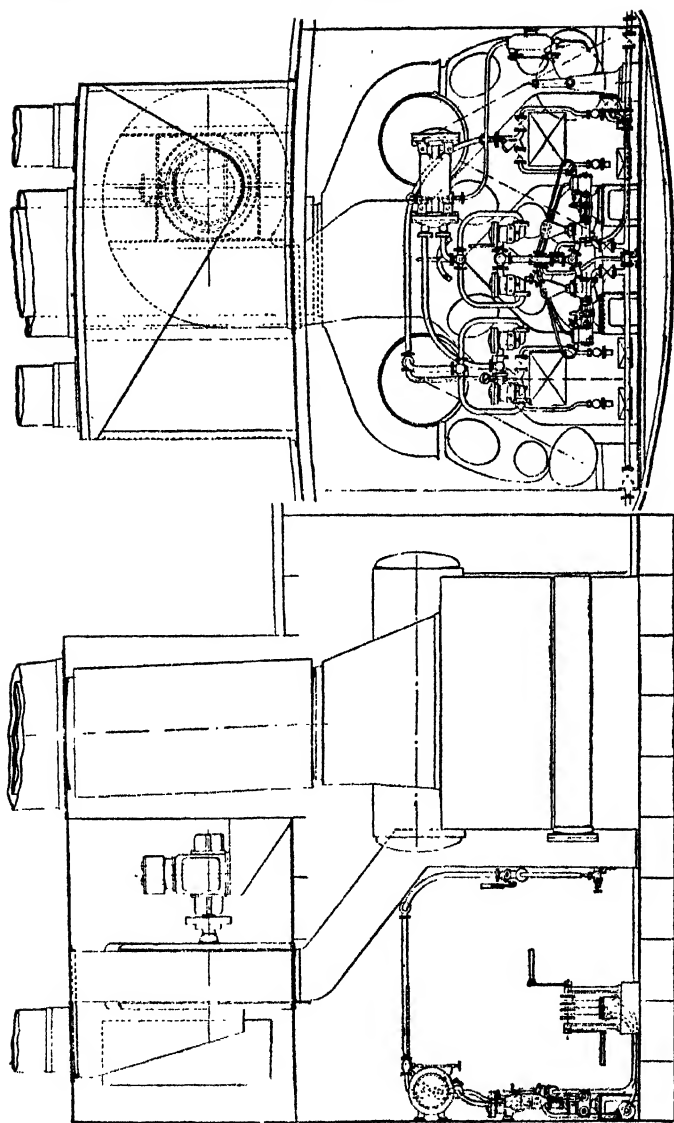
Midship sections showing arrangement of Kermode oil-burning apparatus (pressure-jet system) for Yarrow marine boilers.
